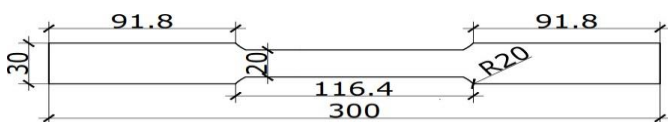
Specimen dimension for tensile stress measurement on UTM-2000kN machine
